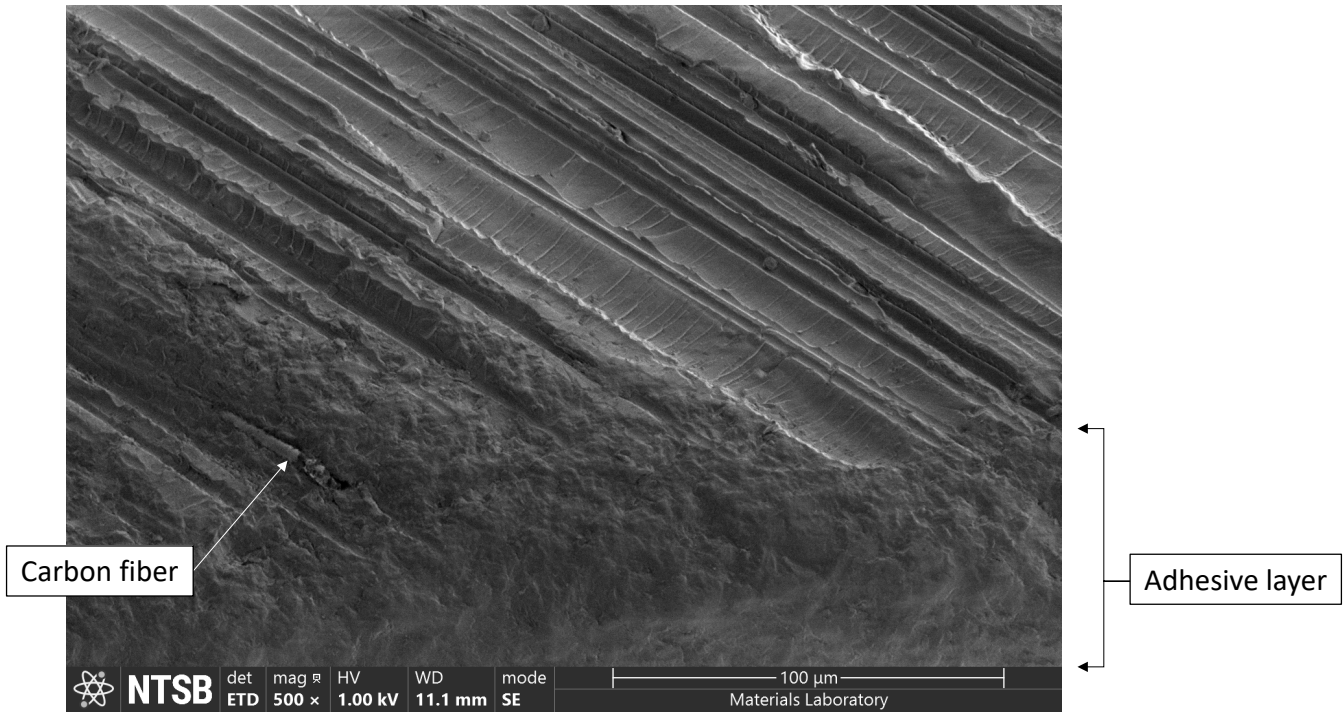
A secondary electron image of the tilted internal adjacent surface of the inboard red blade leading-edge cap flat fracture. Fiber tracks were observed and are oriented upper left to lower right with river line features extending between tracks. The fracture features on the adhesive layer between the leading-edge cap and spar were obliterated.
